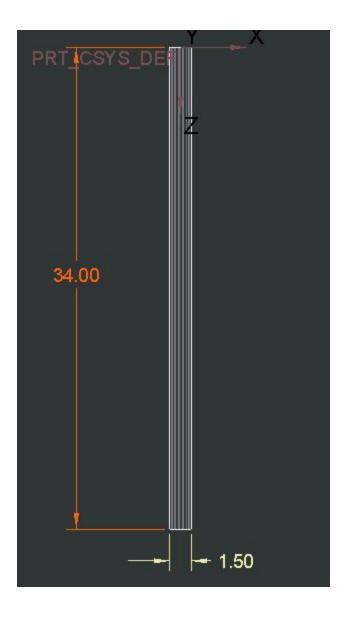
, 30, 31: 2D Creo Shaft Mold Dimensions
